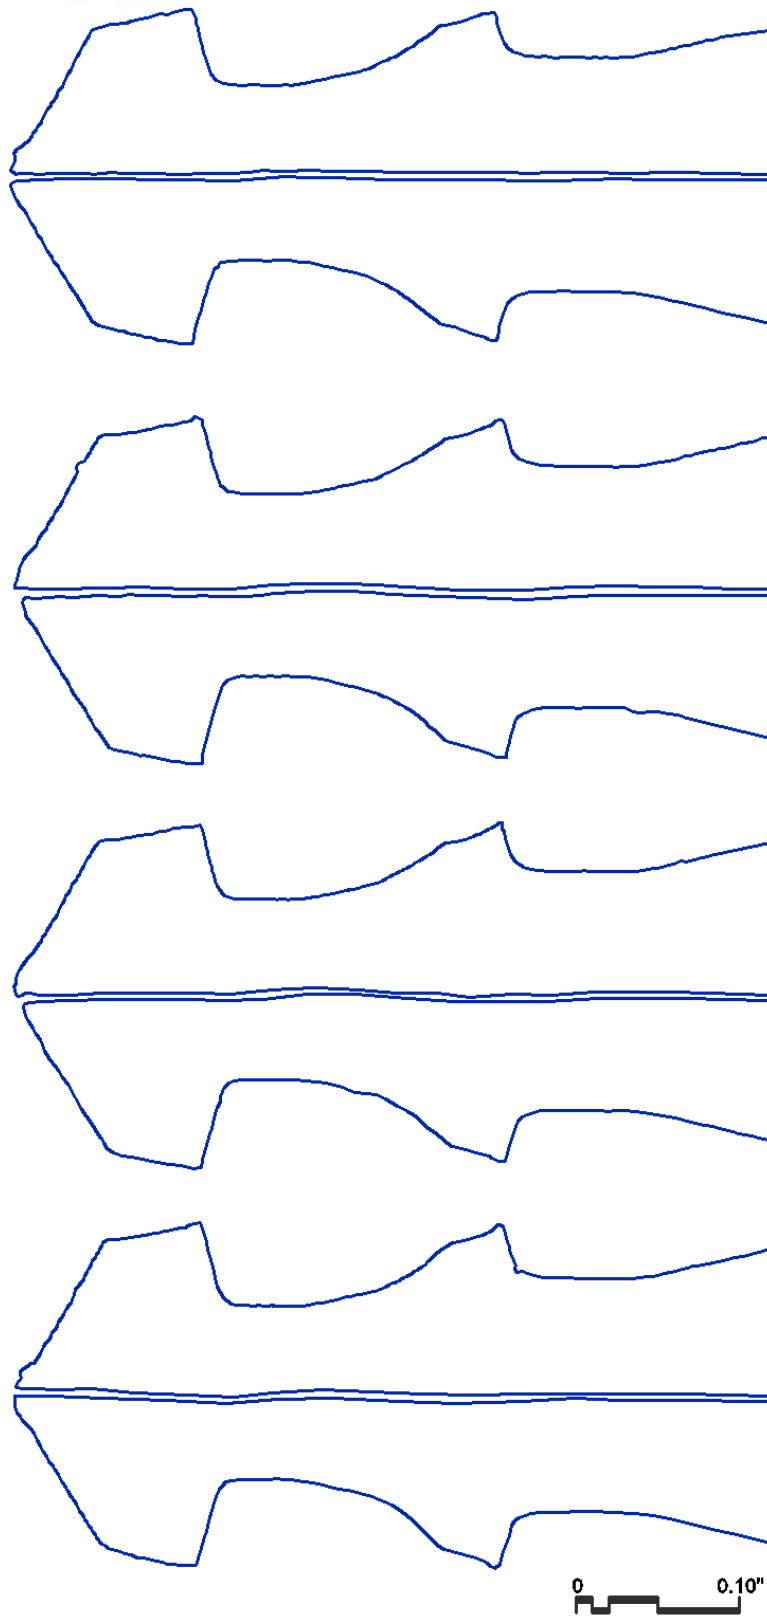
As-Built 0.090 in. Tube-B Coined Pressed-End CAD Generation - Step 4
